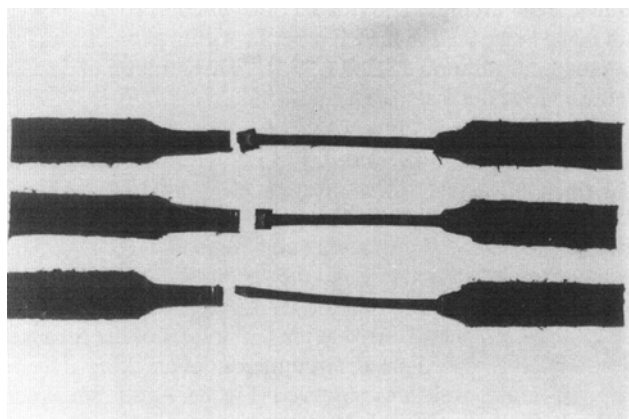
Failure locations for the tensile specimens of the butt-fusion joined pipe
